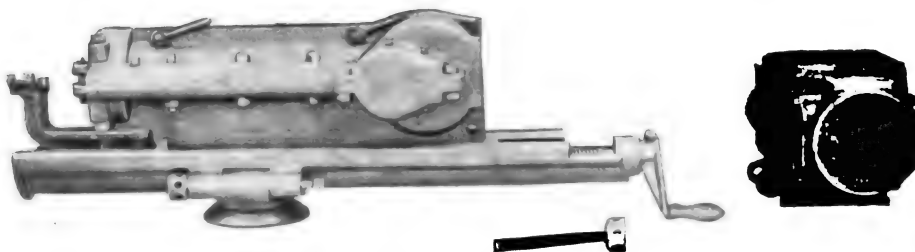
BOX DRILL WITH MOTOR REMOVED.
